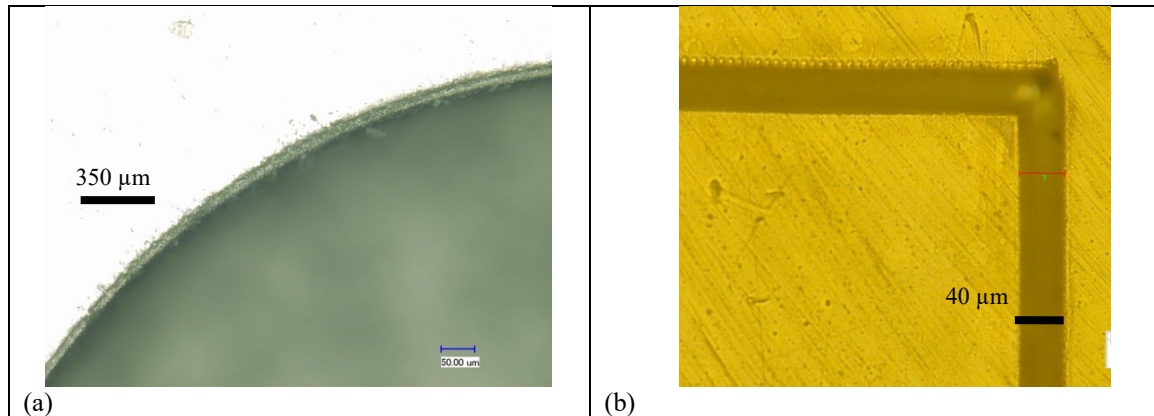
(a) enlargement of a 2 mm diameter hole in 0,4 mm thick sapphire after laser core-drilling with a cutting width of 350 μm ; Located chipping on the edge remains below 20 μm (b) microscope image of a 100 μm thick polyamide foil after laser machining with a cutting width of 40 μm . The polyamide sample was not cleaned after laser machining, showing no signs of carbonization directly after UV-laser micromachining.
